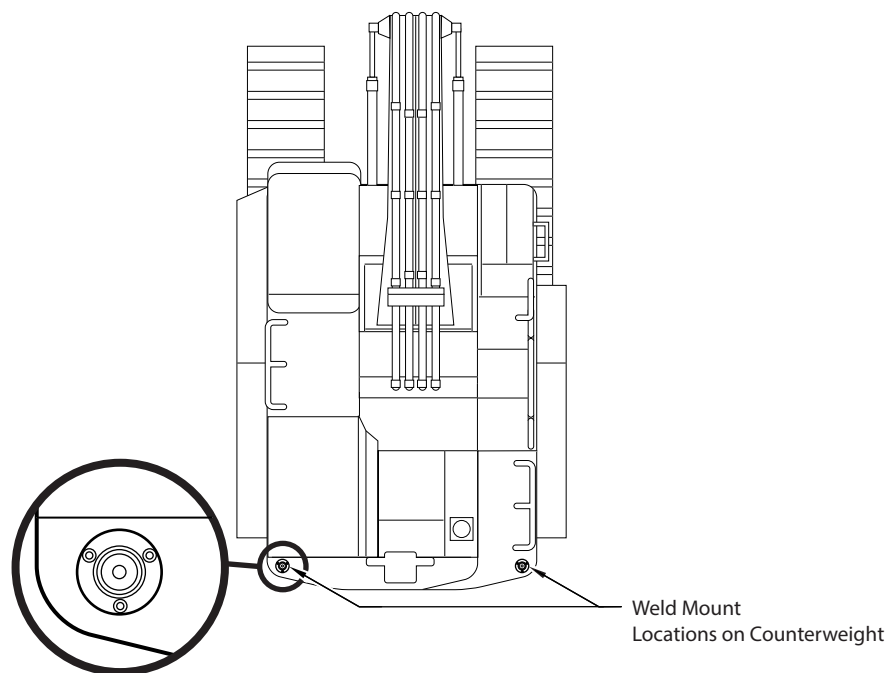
Antenna Pole Mount Weld Mount Locations
